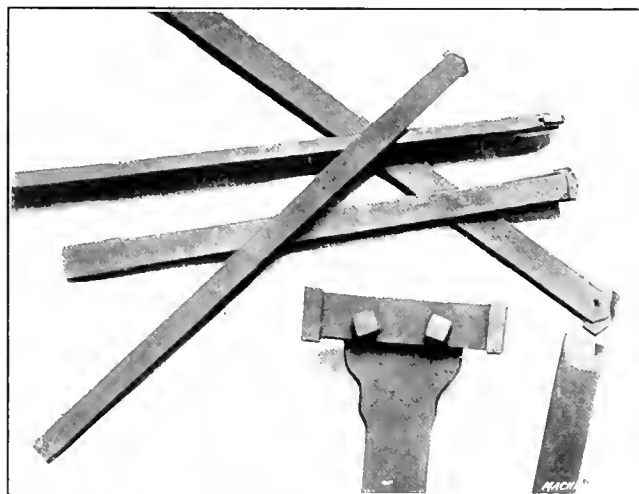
Spindle Drills and Large Double-tipped Channeling Plauer Tool
